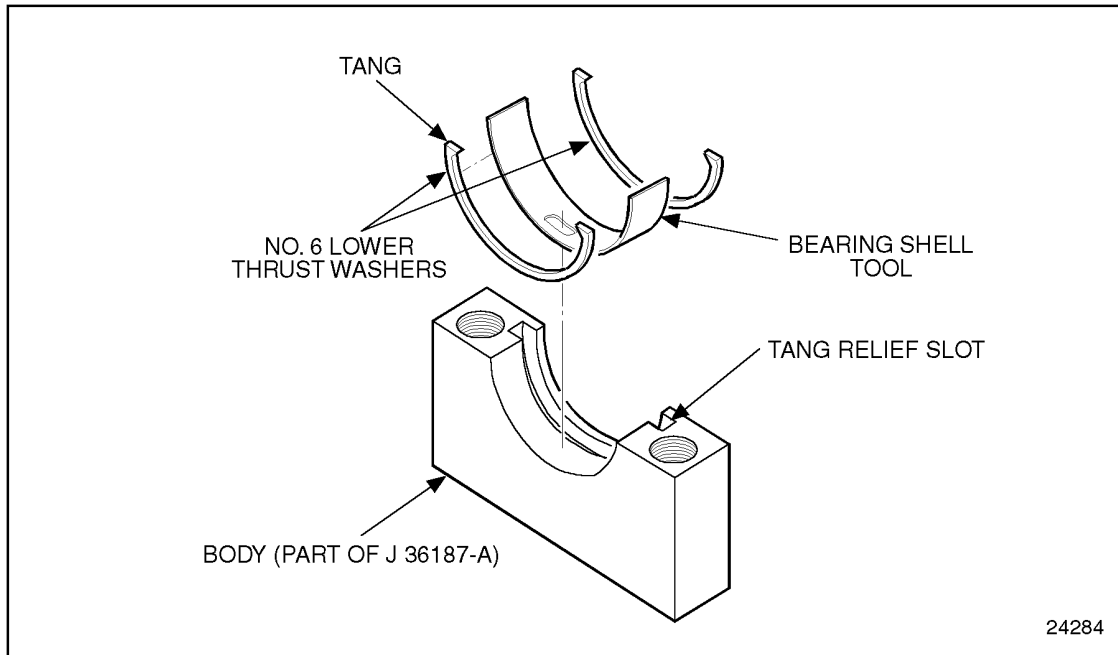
Upper Main Bearing Shell Removal-Tool Set-up
